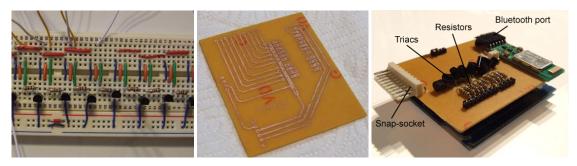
Circuit in 'breakout' form (left); breakout circuit as PCB (middle); final PCB (right).
